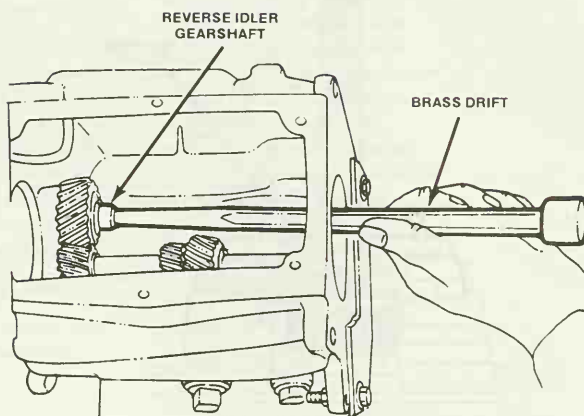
A brass drift is used to drive out the reverse idler shaft. (American Motors Corporation)
